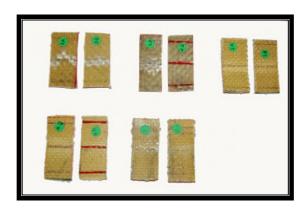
Photographic picture show the fracture surface of all samples
